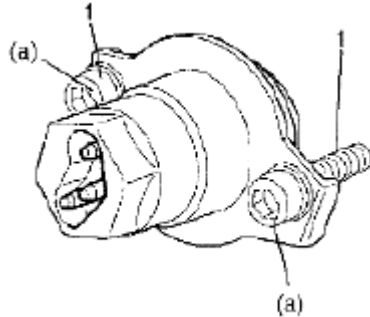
Identifying Cylinder Block Heater Mounting Bolt
